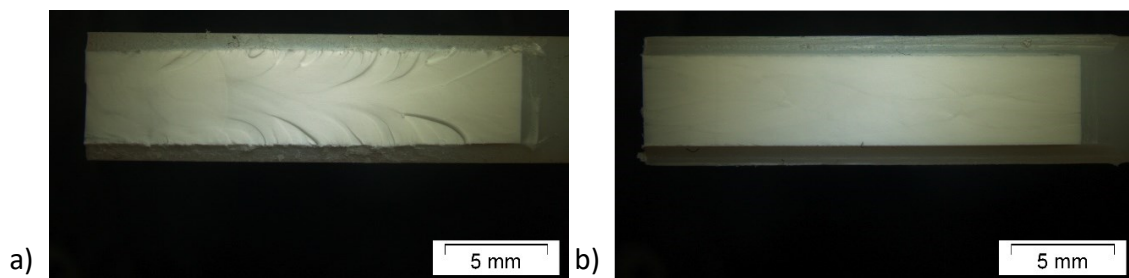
Fracture surfaces of HIPS A CT specimens with side grooves tested in air: a) bad surface quality and b) good surface quality.
